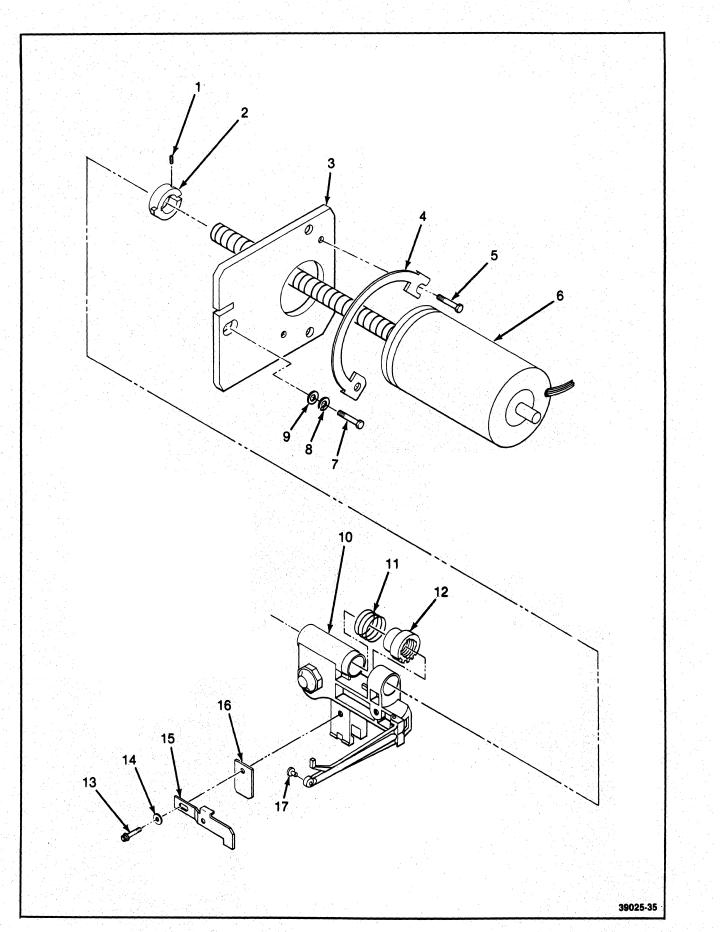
DRIVE ASSEMBLY SA800/801 EXPLODED VIEW (SHEET 2 OF 2)
